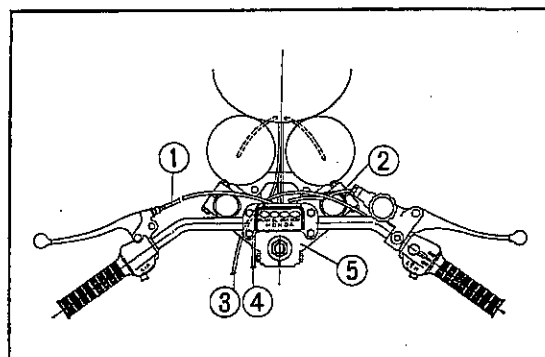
① Clutch cable ② Front brake hose ③ Throttle cable ④ Wire harness ⑤ Fork top bridge
